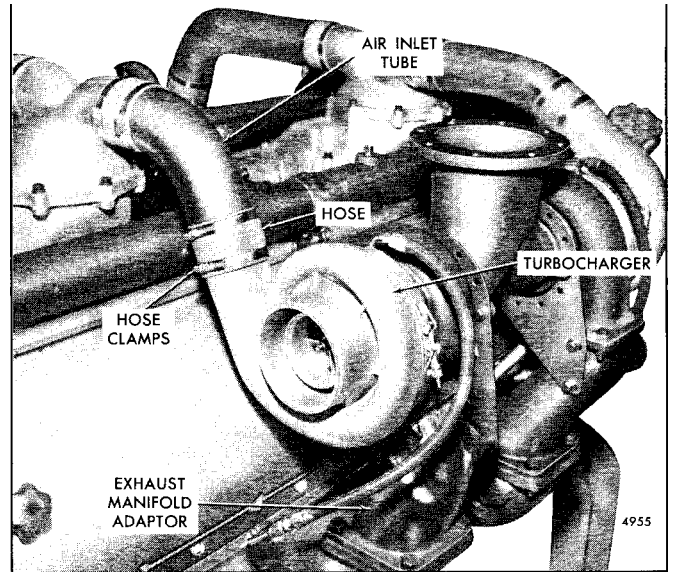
Turbocharger-to-Air Inlet Tube Connection
